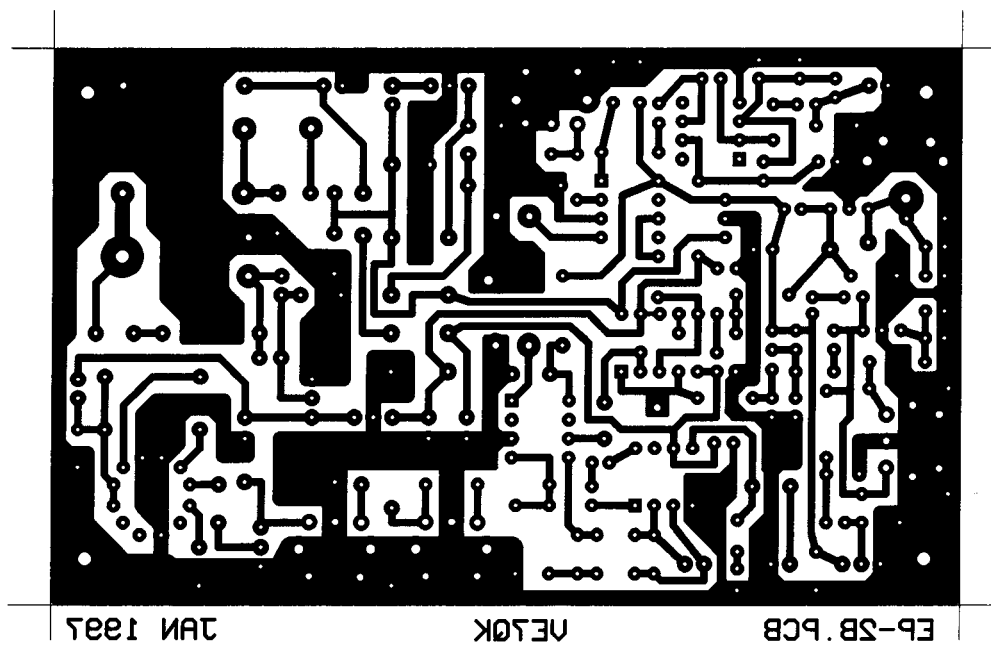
Epiphyte-2 PCB layout. This image is reversed
